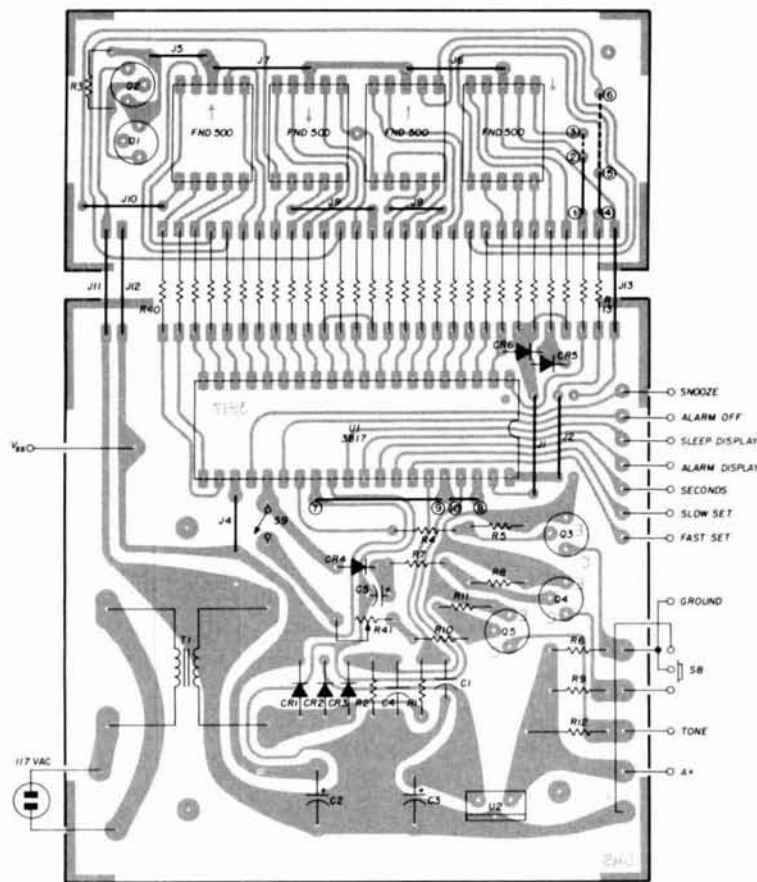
Component placement on the digital-clock PC board. A full-sized printed-circuit layout is shown in fig. 6.
